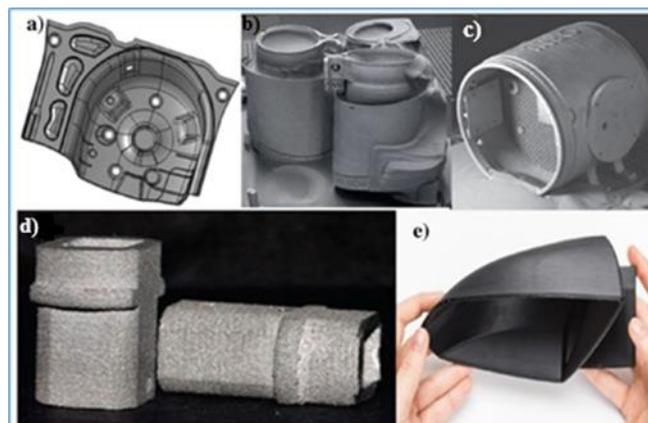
AM-produced automotive components include: (a) a body panel model to be generated with AM; (b) a titanium tailpipe made with powder bed fusion; (c) a hydraulic manifold made with EBM; (d) a turbocharger made with a 3D printer; and (e) a motorcycle wing mirror made with FDM. (Elif Karayel and Yahya Bozkurt, 2020)
